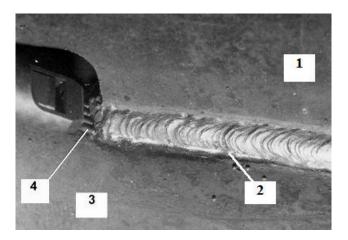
Photo of the "groove" produced by ultrasonic impact treatment of the end of welded stiffener published in 1989 [3]: 1 – welded stiffener, 2 – "groove" produced by UIT/UP, 3 - base plate, 4 – strikers of UIT tool
